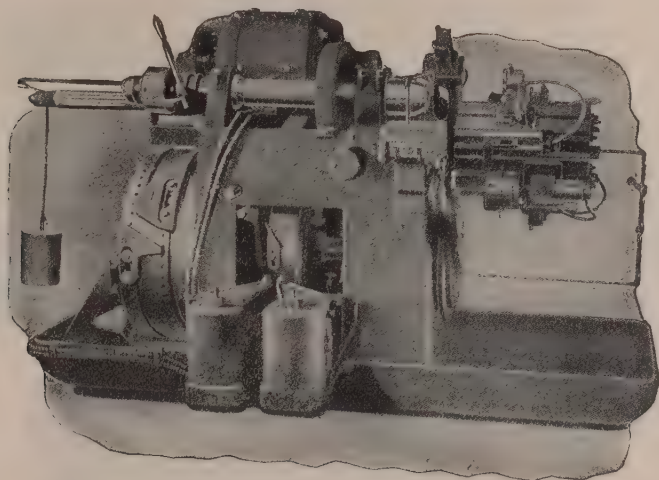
The Gridley Automatic Screw Machine, especially adapted to making Bolts, Studs, Short Shafts, etc. Note the Automatic Change of Speeds and Feeds by Self-acting Electric Controllers. The Feed and Spindle Drives are operated by separate Motors for this purpose.
